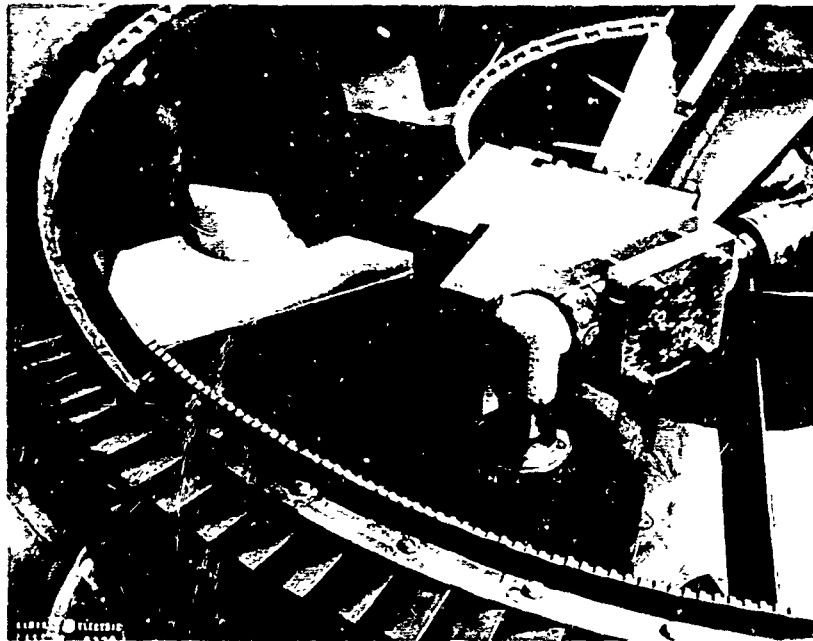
FRONT FRAME AIR SEAL GRINDING FIXTURE
